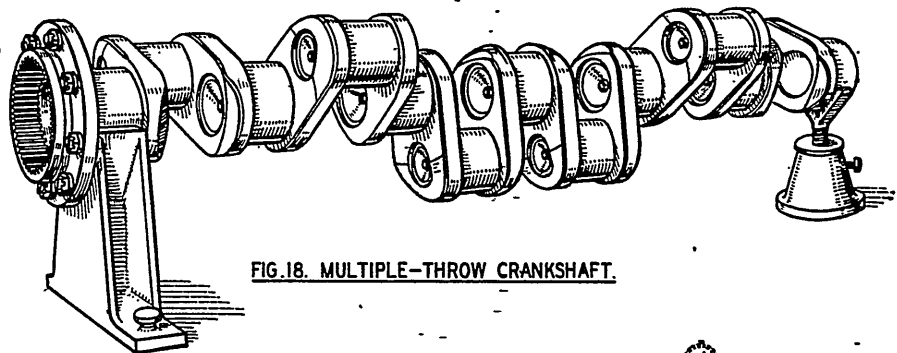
MULTIPLE-THROW CRANKSHAFT.
